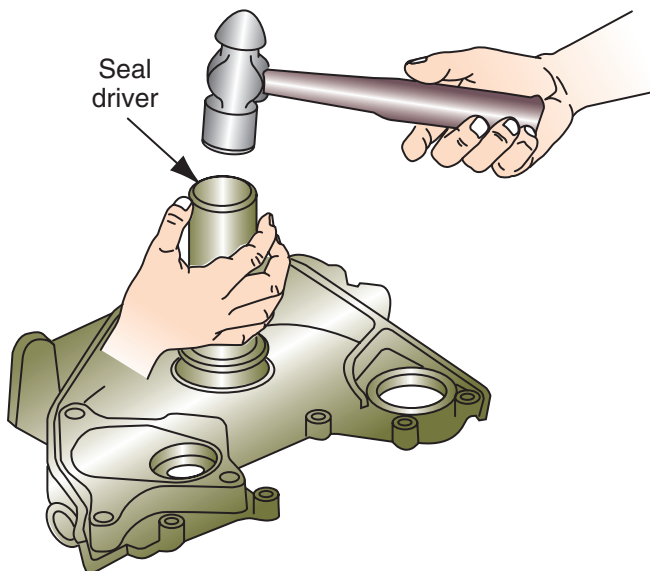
The installation of the timing cover oil seal requires the use of a special tool or driver.
